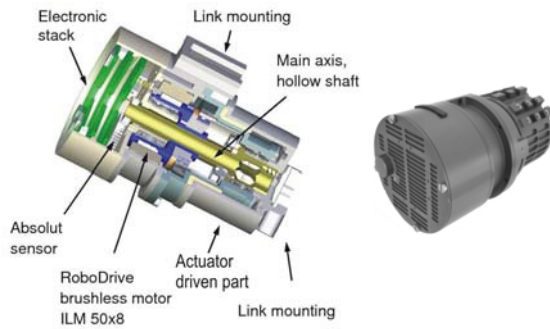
Labeled CAD drawing (left) and picture of an integrated actuator module (right)
